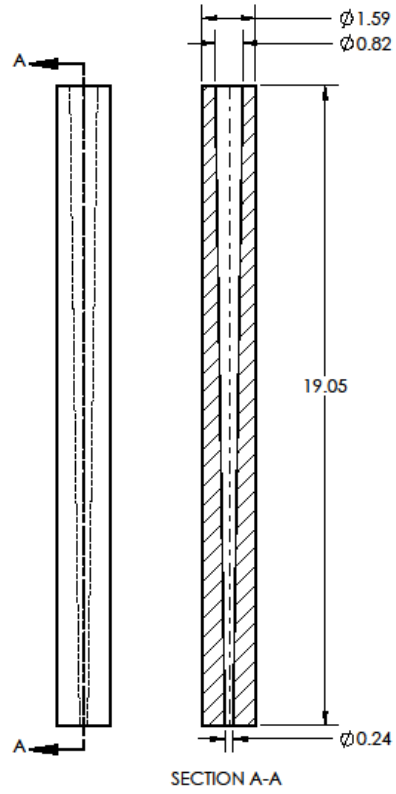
Tungsten carbide linear converging nozzle (dimensions are in mm).
